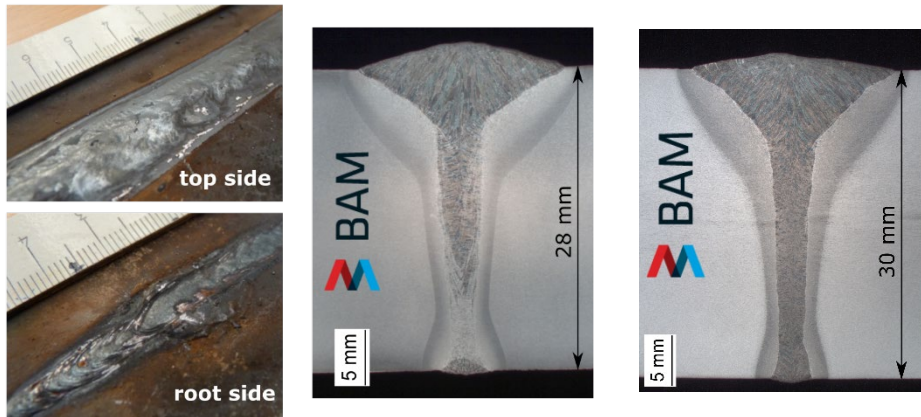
Cross sections for single-pass hybrid laser-arc welded 28 mm thick plates (left) and 30 mm thick steel plates (right)
